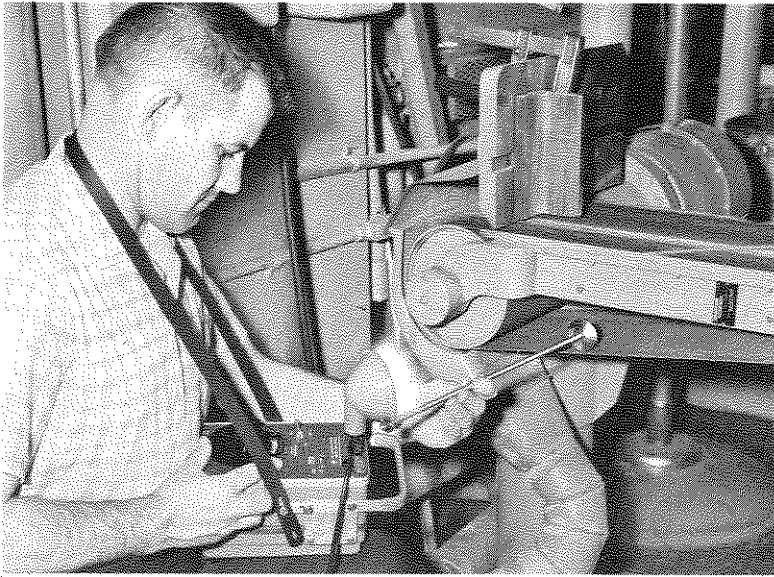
Measuring belt speed on a sanding machine, using Type 1531 Strobotac and Type 1531-P3 Linear Speed Wheel.
